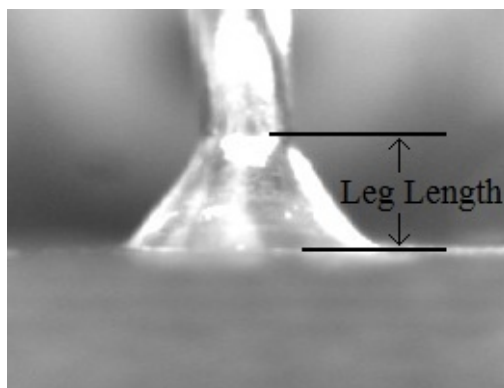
Side view of a solder joint, showing the leg length of the joint's bottom fillet.
